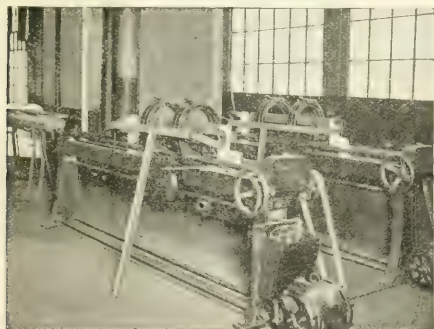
MICA WRAPPER BEING APPLIED IN MACHINE
